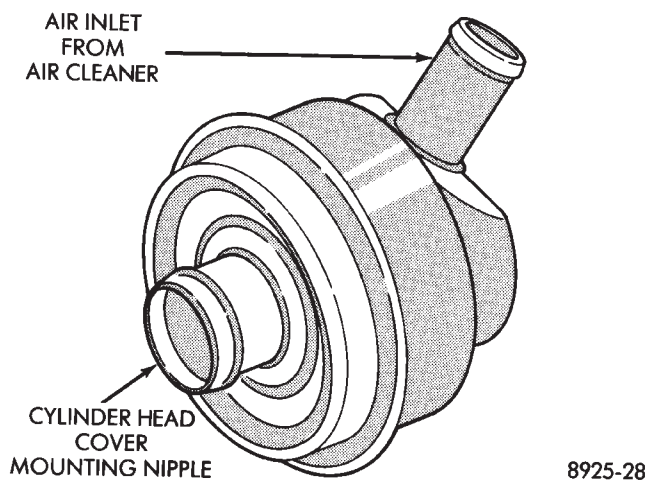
Crankcase Breather/Filter—5.2L Engine
